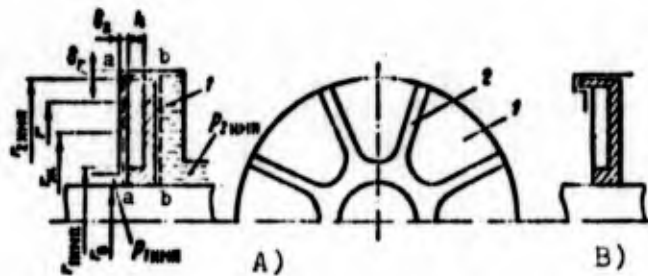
Diagram of impeller seals of a shaft with unshrouded A) and shrouded B) impellers: 1 - disk of the impeller; 2 - blade of the impeller.
